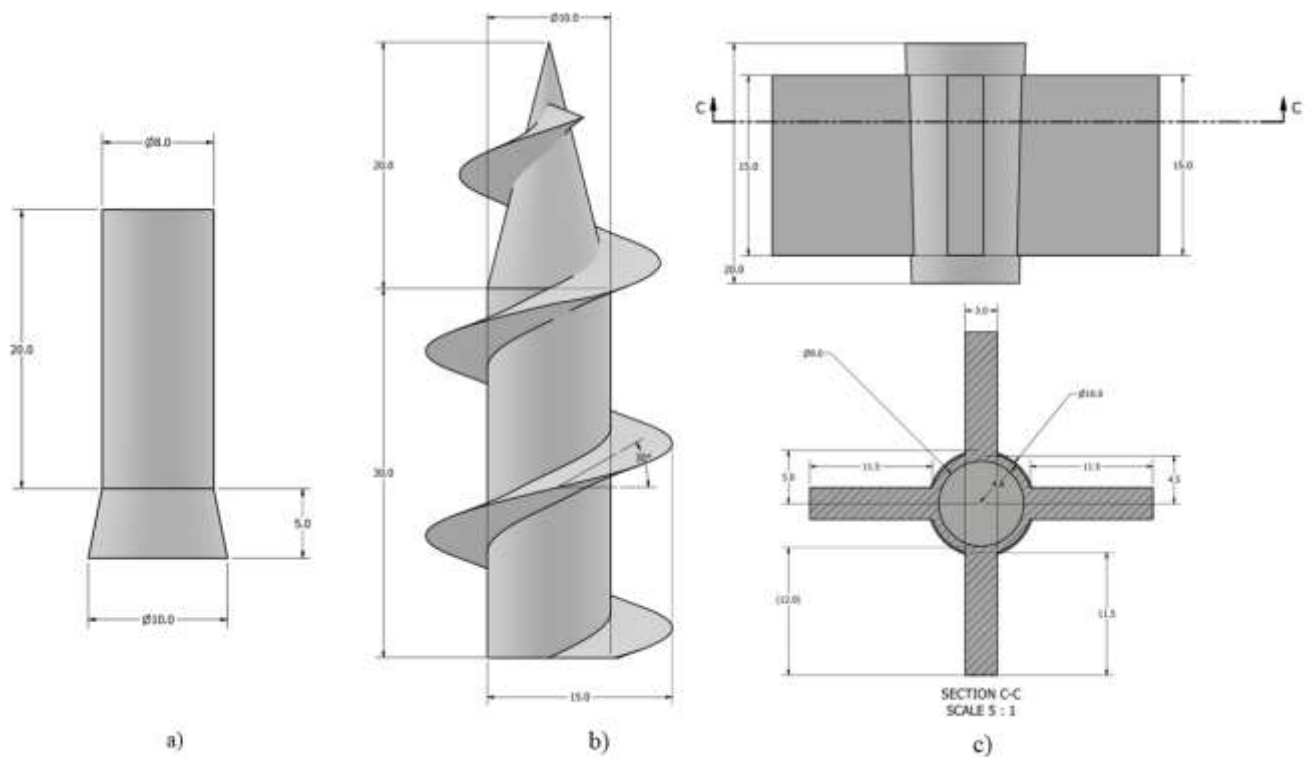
Detailed dimensions of the robot's components. (a) Lower stator dimensions, (b) Auger dimensions, and (c) Cross-sectional view of the upper stator, showing the arrangement of the blades and connections. All dimensions are in centimeters.
